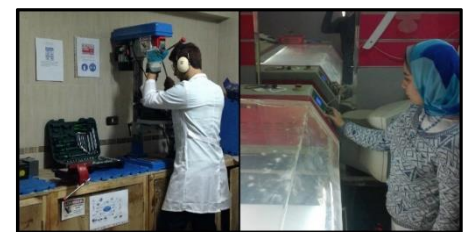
Ahmed drilling the end cap and Sondos using laser-cutting machine
